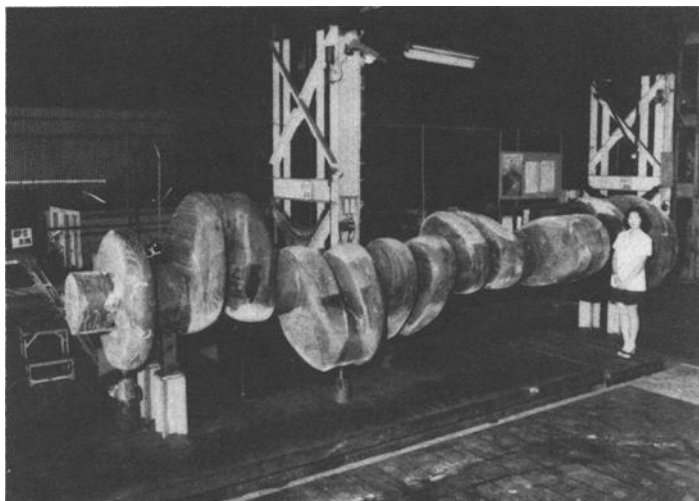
Crankshaft forging (Sulzer Type RLA56) weighing 37.4 tons forged by the TR method.
